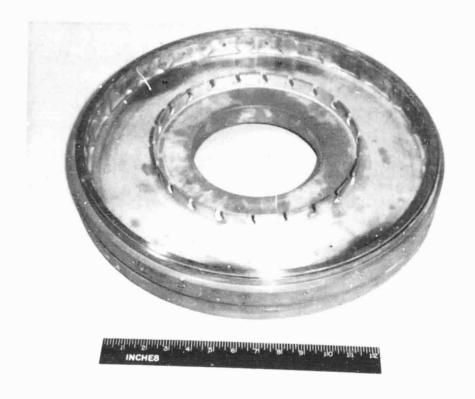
High-Pressure Compressor Twelveth Stage Rotor Detail
